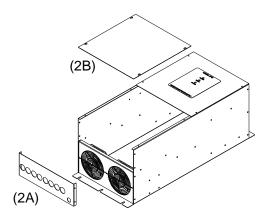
Installation Instructions for Extended Conduit Access Covers
